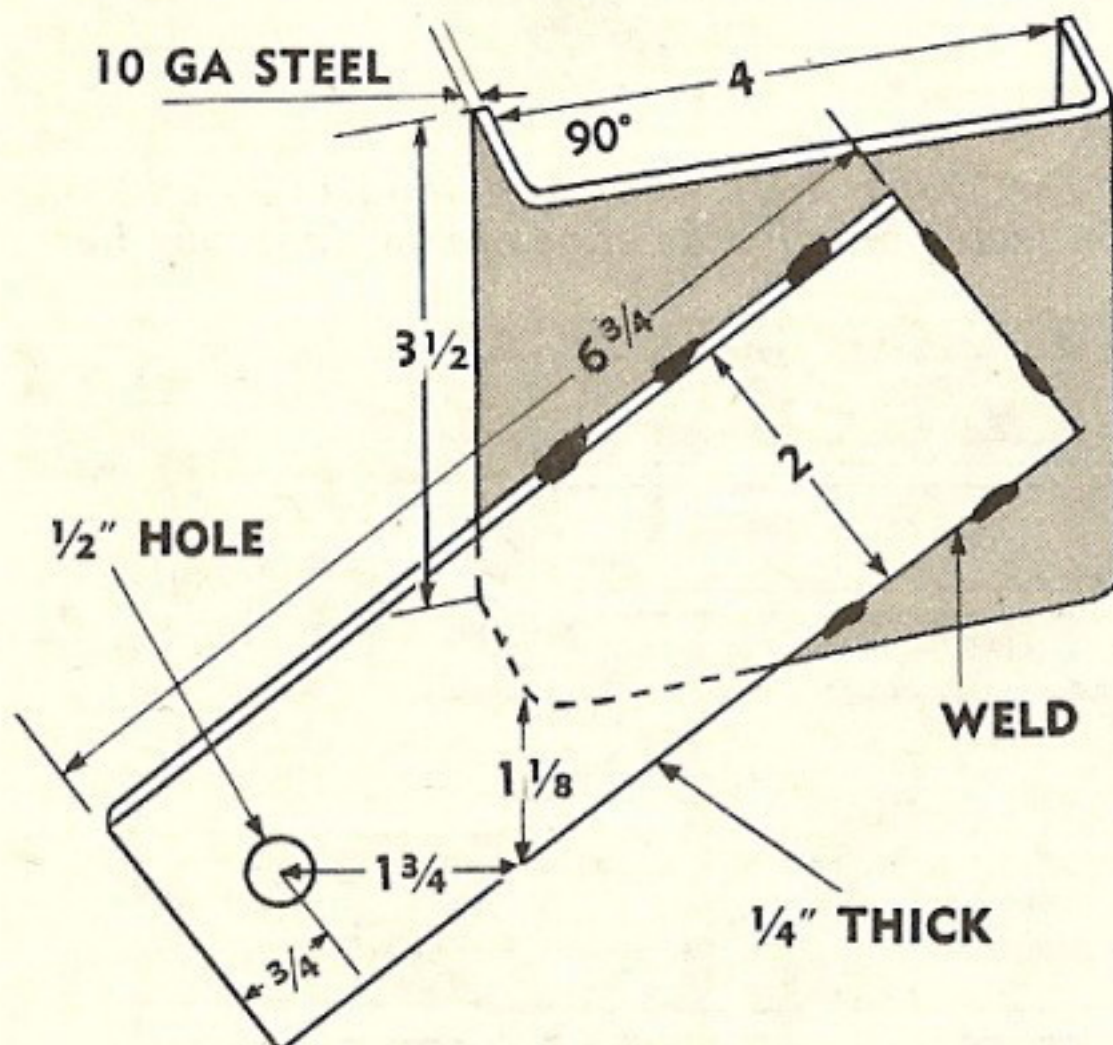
Upper-radiator-brace bracket, showing position of bar for welding to "U" piece.
